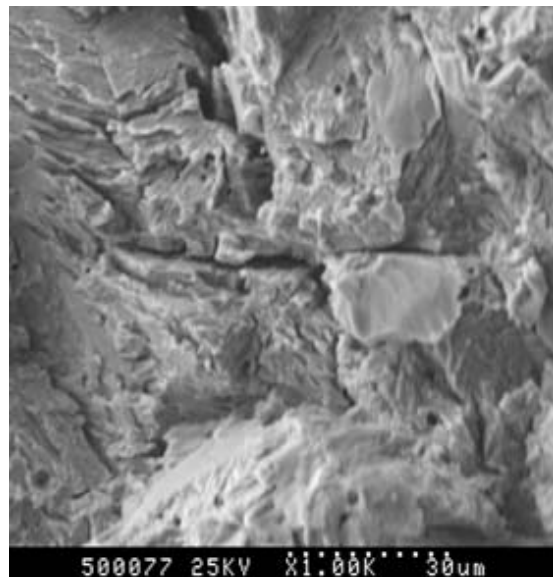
316 tested in 25 MPa H_2 at -40°C showing brittle fracture (1000x)
